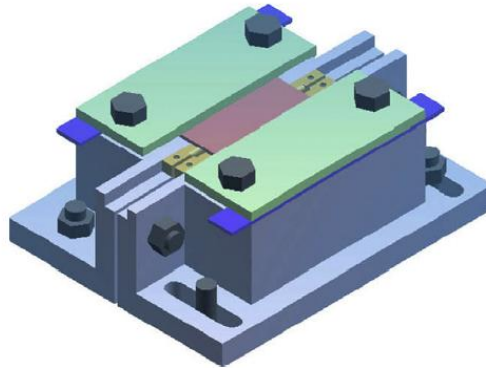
3D model of clamping tool used in FSW of T-joint, [23]
